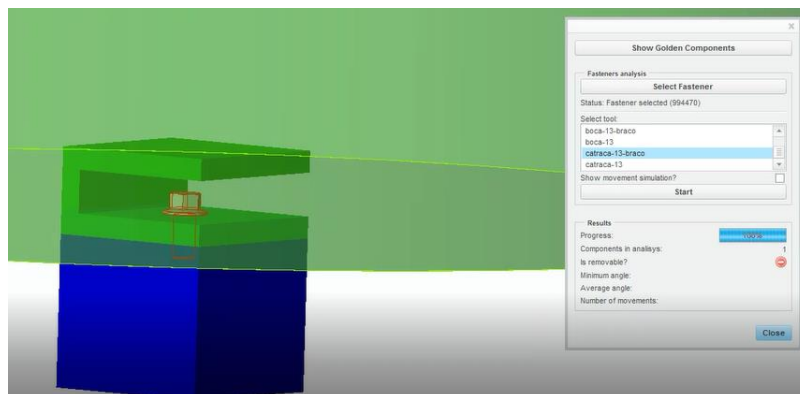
Top barrier of 20 mm – not possible to remove fastener
